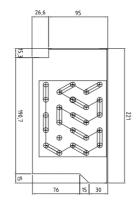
Evaporator Drawing - SC1780F, SC2090F
